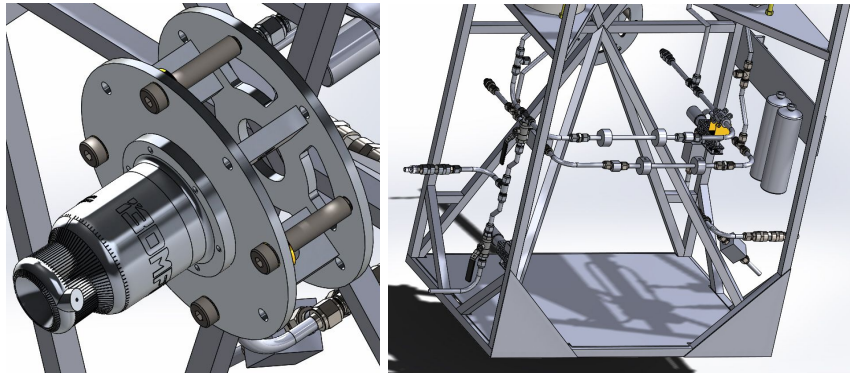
Pictures of the test stand Solidworks model showing the engine on the thrust plate (left) and the lower fuel and LOX sections (right).
